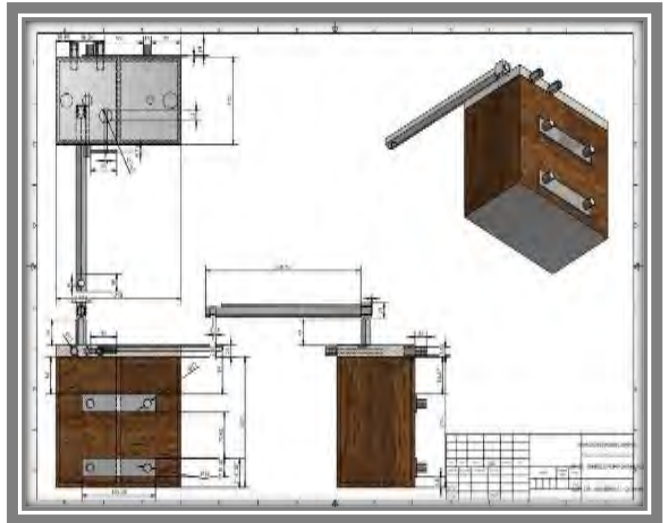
SN 36. Movable Wheel Port/Pump (Manual)
